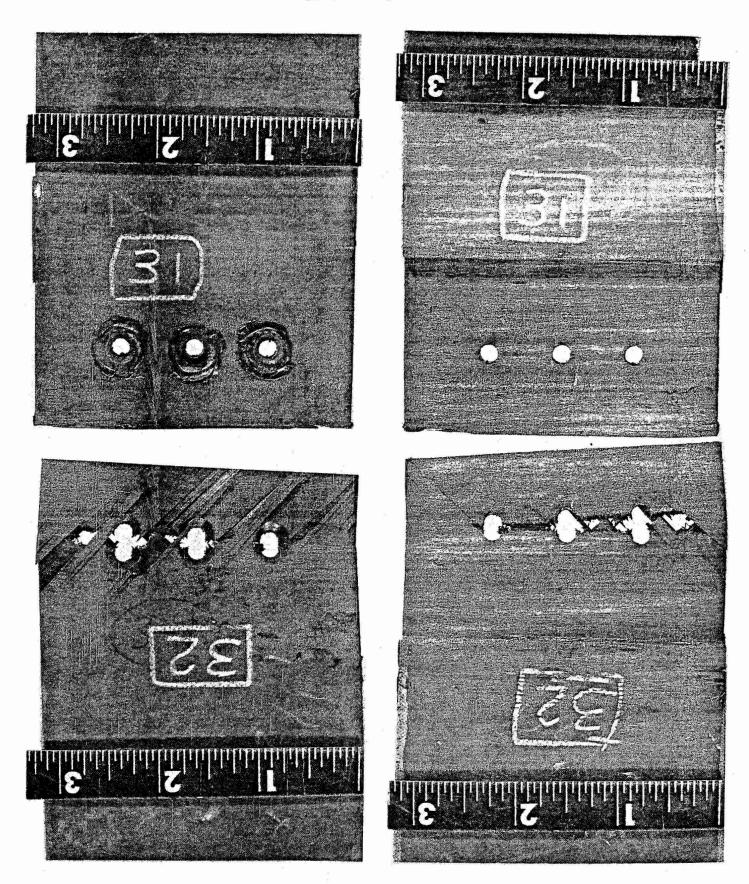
Failure of a Sealed Joint Specimen Tested Statically at -65° F.
